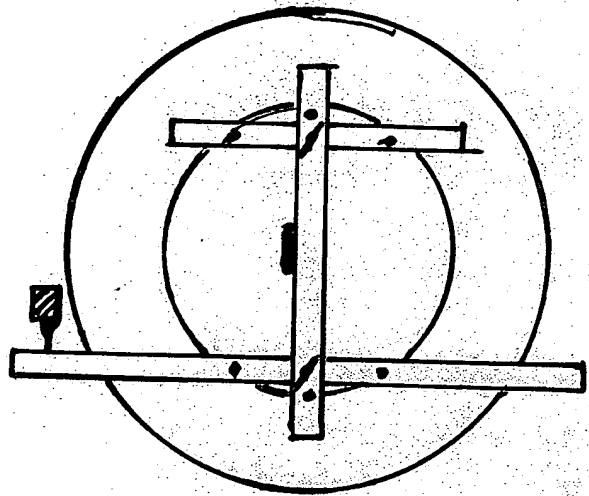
STEERING AXLE ON ROLLER PLATES WITH ALIGNMENT UNIT
